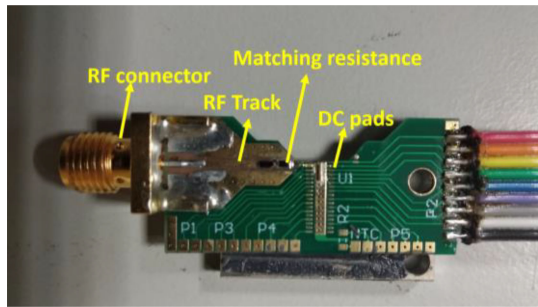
Photograph of the PIC mounted on a PCB and wirebonded to electrical contacts.
